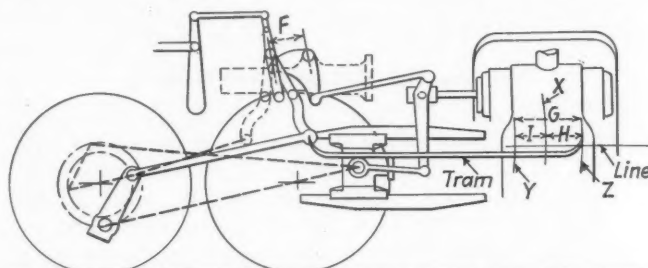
Baker valve gear showing dimensions used for determining correct eccentric-rod length
